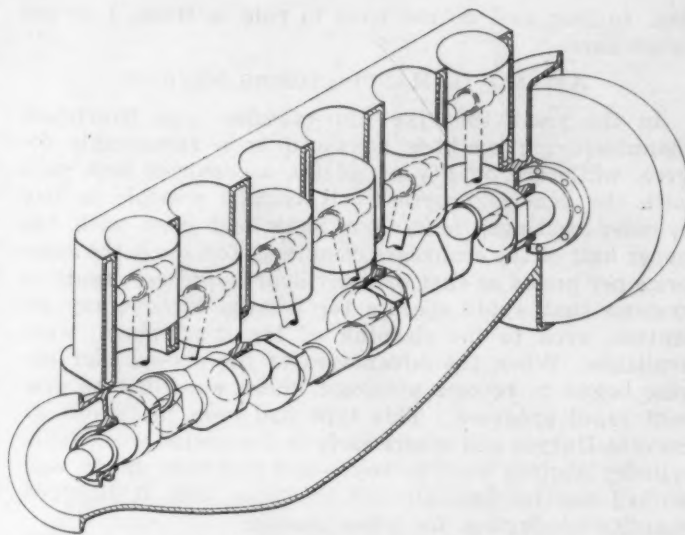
SIX-CYLINDER FOUR-BEARING ENGINE
